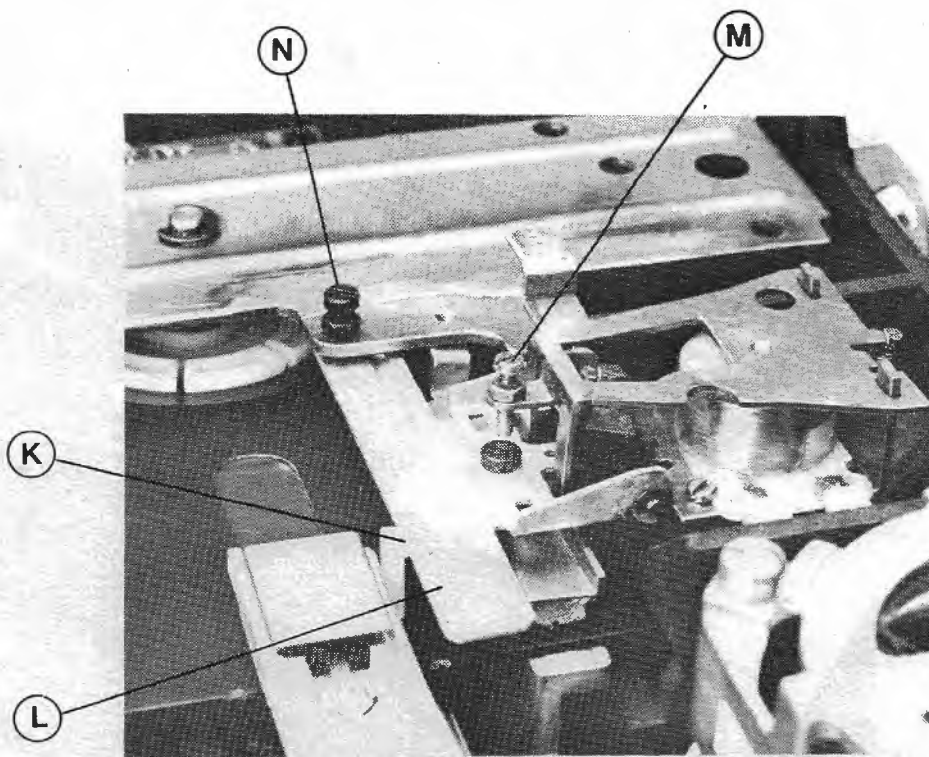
FD 801/FD 802 - Head Load E.M. Regulation
